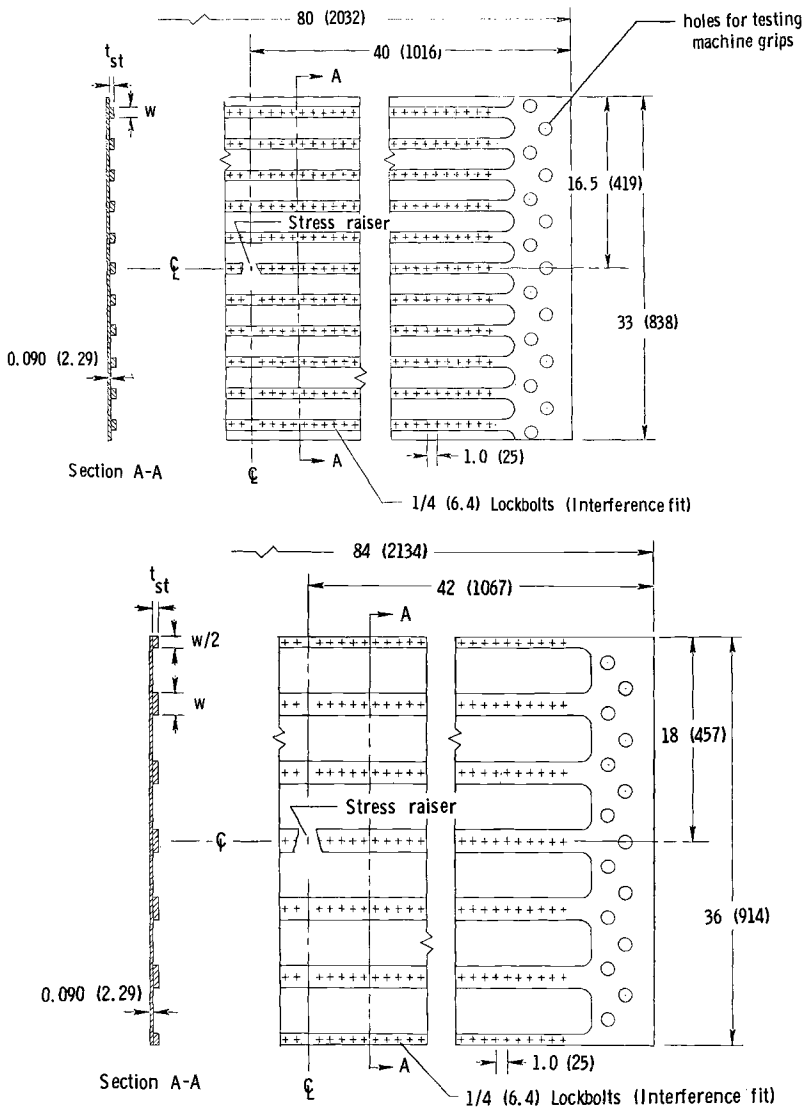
Panels with bolted stringers: top, 3-in. (76-mm) stringer spacing; bottom, 6-in. (152-mm) stringer spacing. Dimensions are in inches (millimeters).
